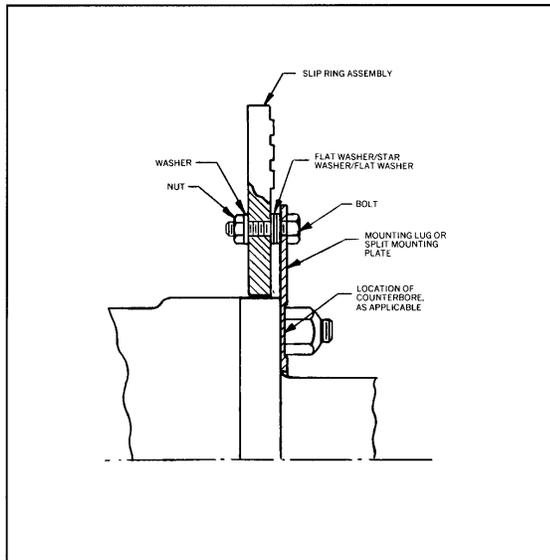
Slip Ring Assembly Mounted on Spinner Bulkhead
